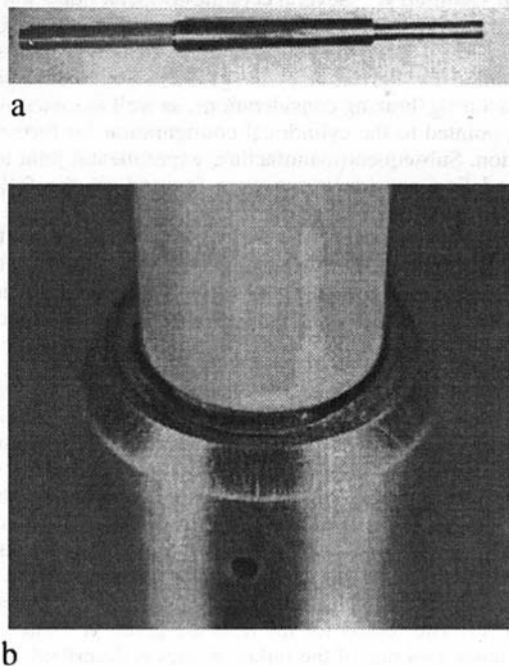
Brazed $Si_3N_4/Ni/Incoloy$ 909 joint. Test sample for torsion and mechanical fatigue testing. The ceramic is 1.27 cm in diameter and the metal is 1.946 cm in diameter.
